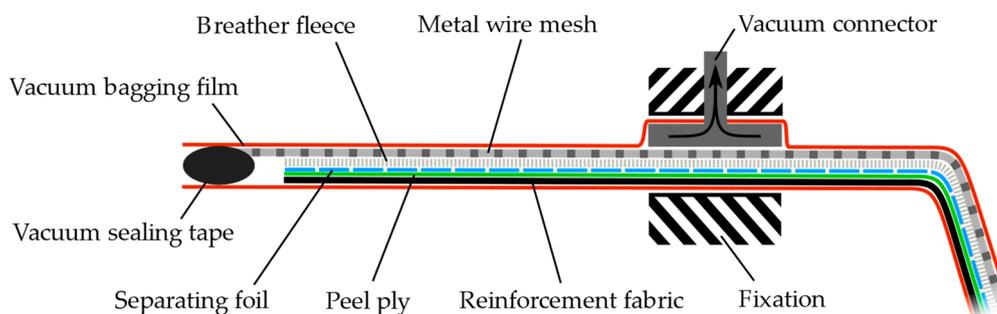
Schematic layout with a vacuum bag enclosing wire mesh and reinforcement fabric.
